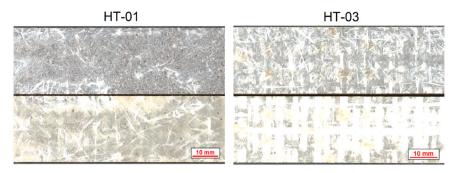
Representative fracture surfaces from specimens tested at high (crack growth direction to the right).
